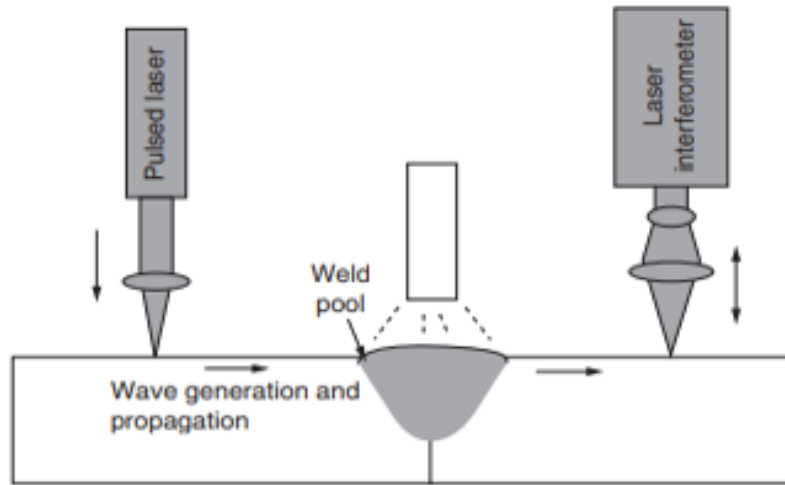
Schematic of laser ultrasonic for online inspection of a welding process [58]
